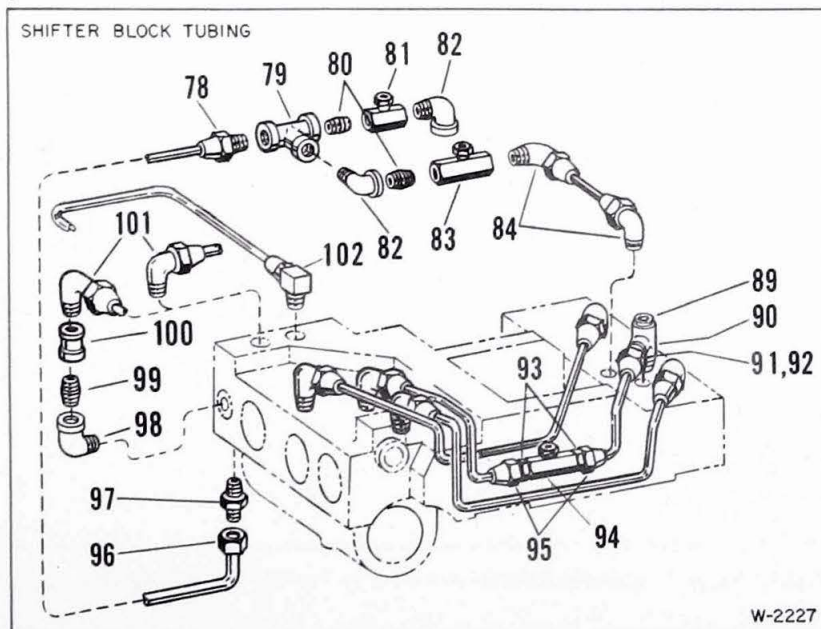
Shifter Block Tubing - 17" and 19" Lathes
